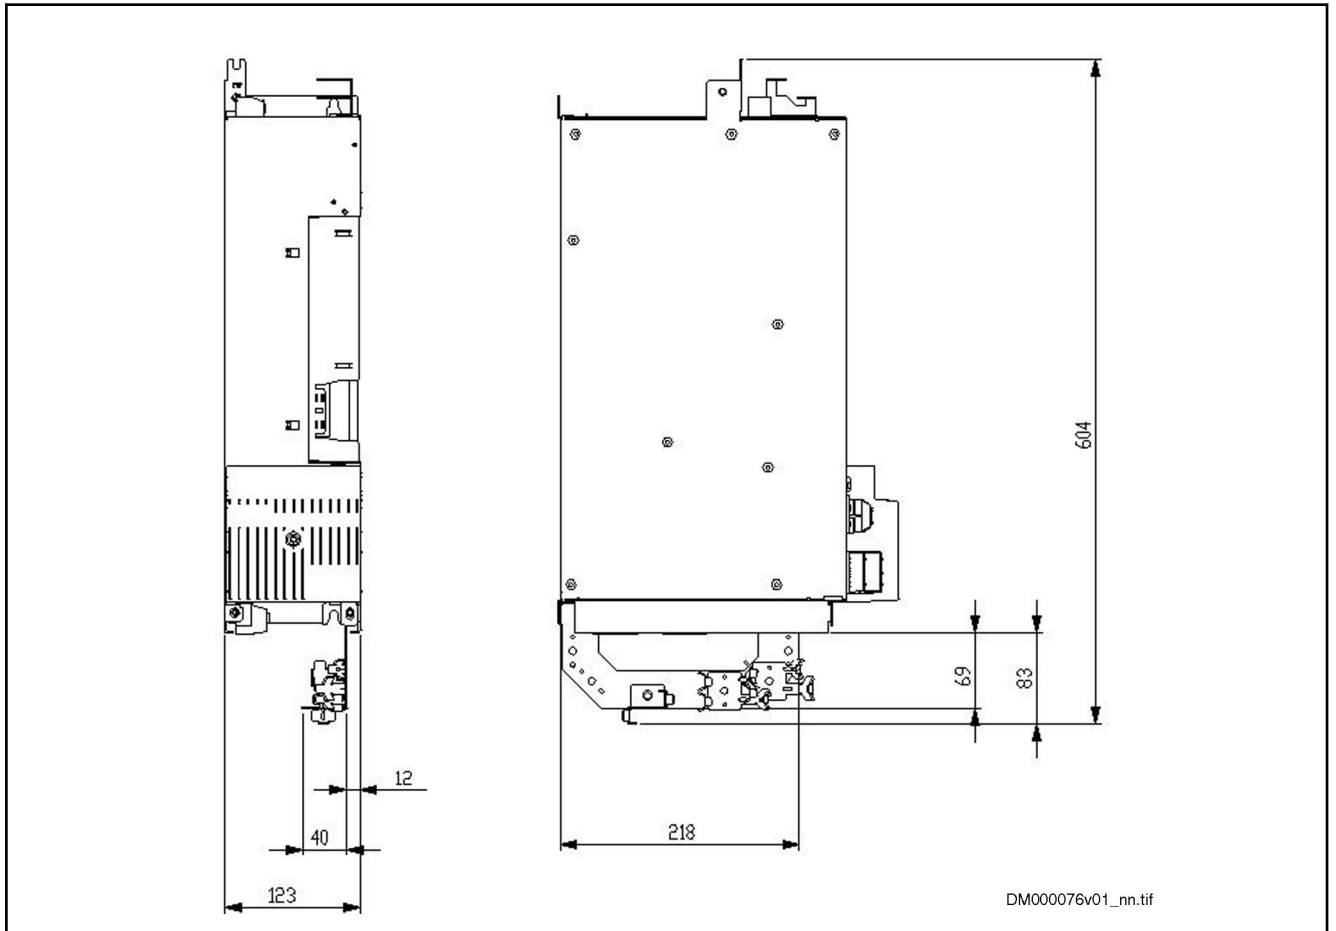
Dimensional drawing HCS03.1E-W0070 with HAS02
